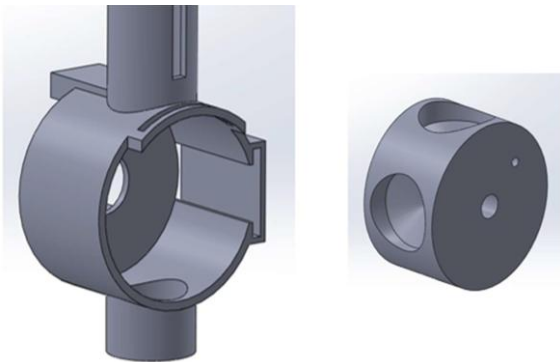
Feed Mechanism Housing (Left) and Drum (Right)
